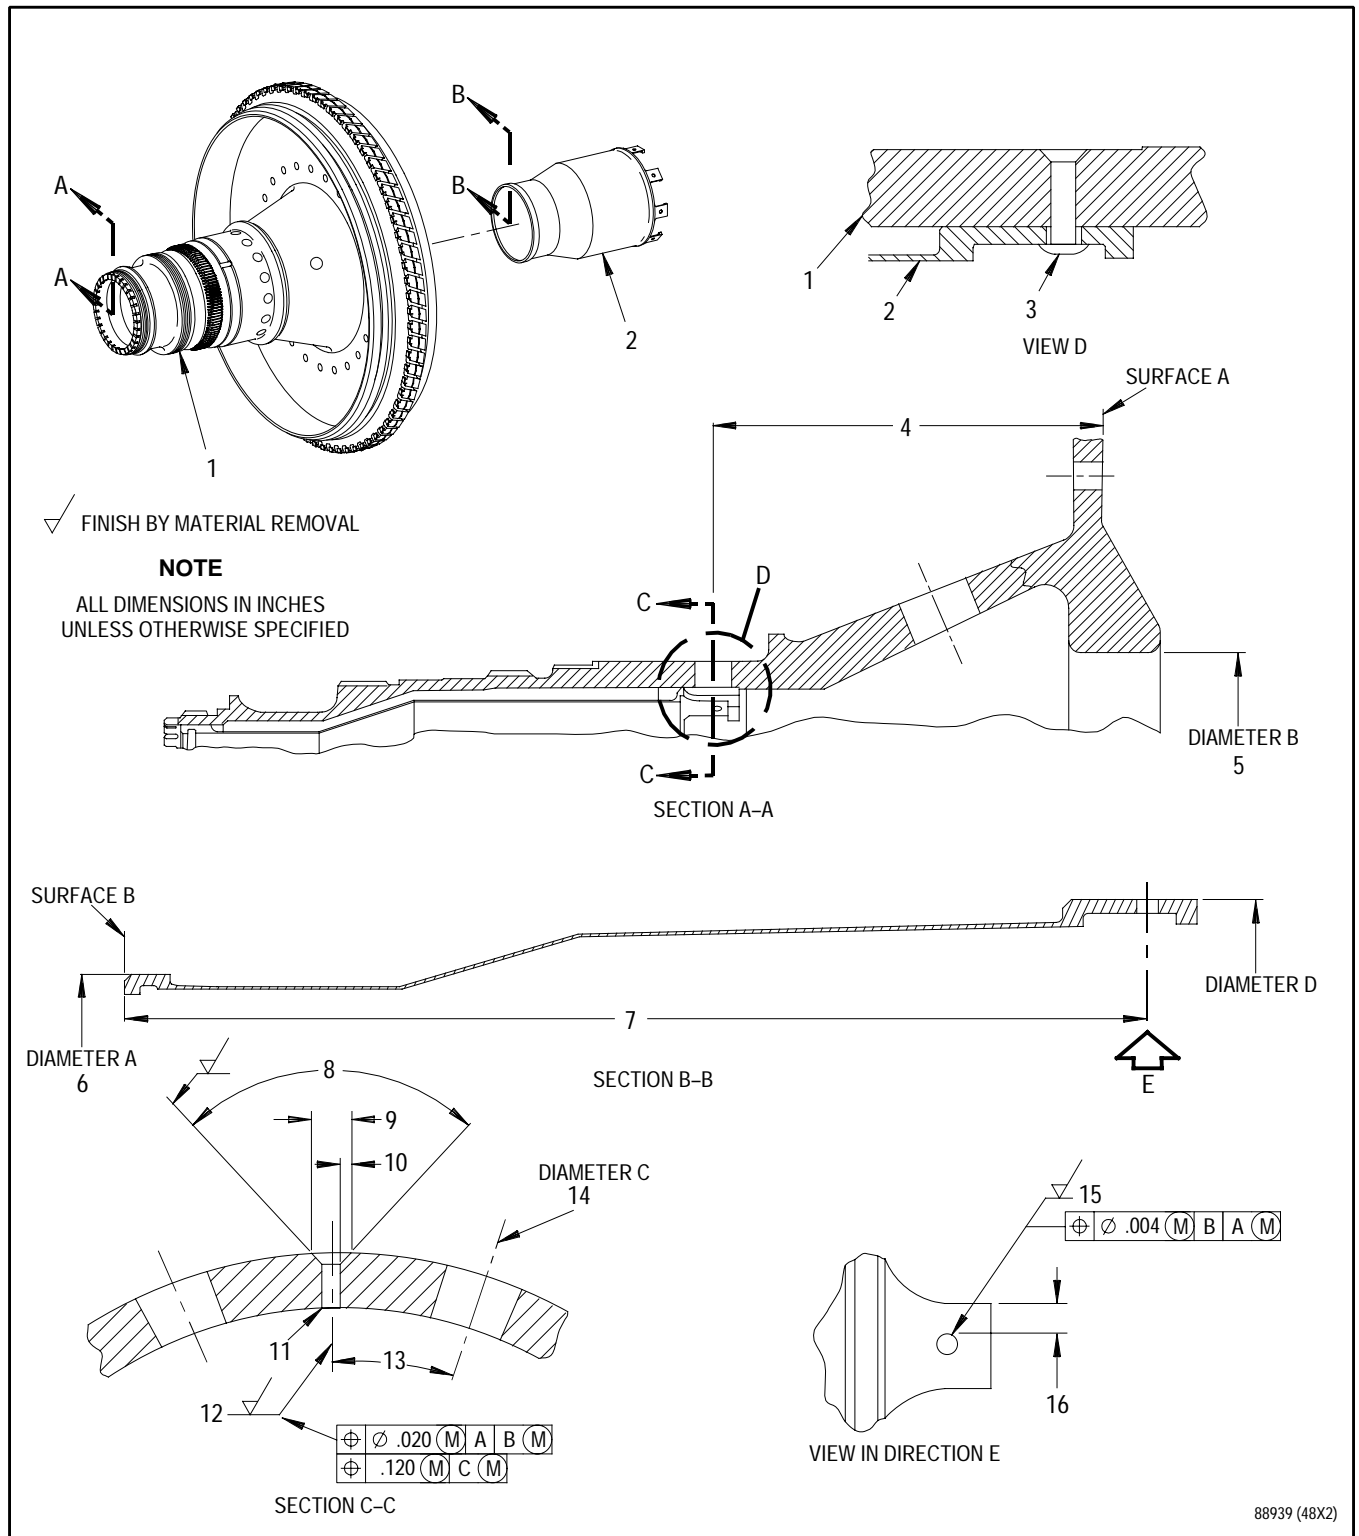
Sixth Stage Compressor Disk and Hub Assembly - Removal and Rivet Hole Machining
